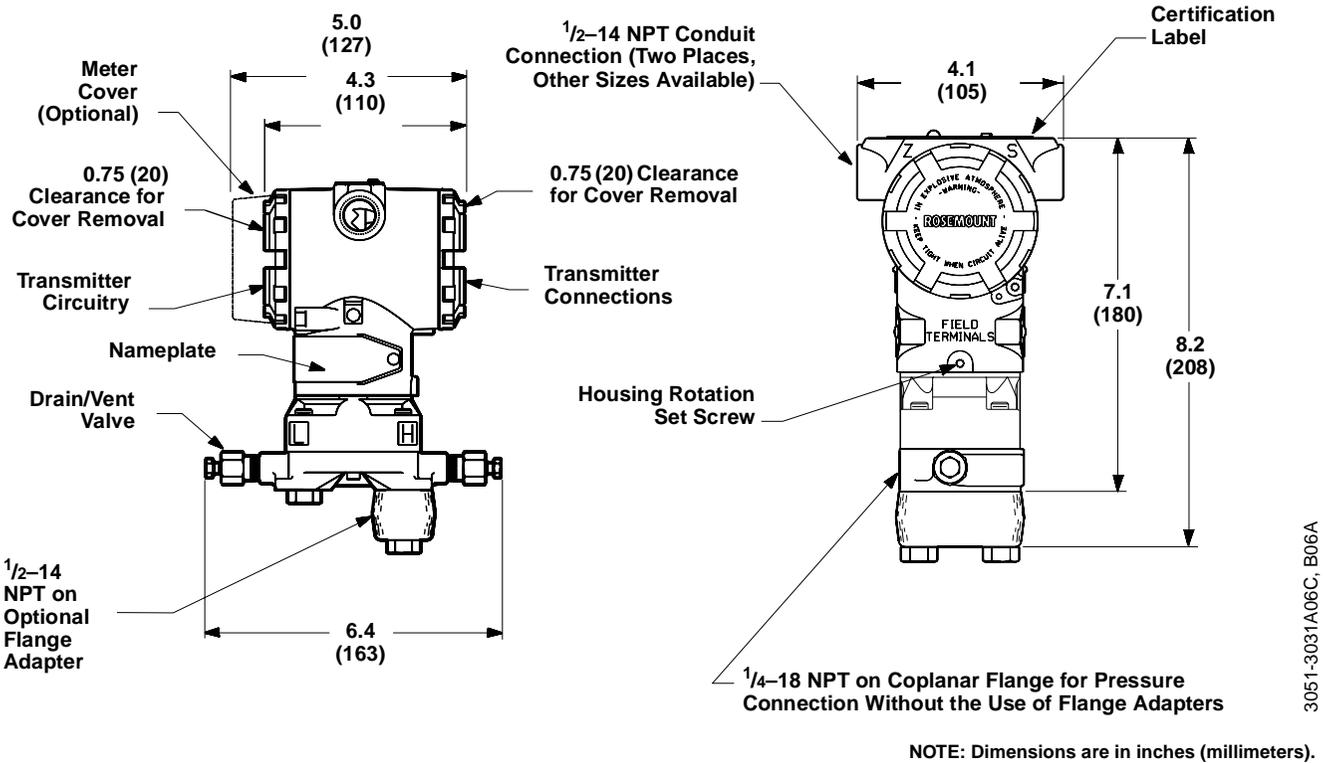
Model 3051C (Traditional Flange) Dimensional Drawings.
